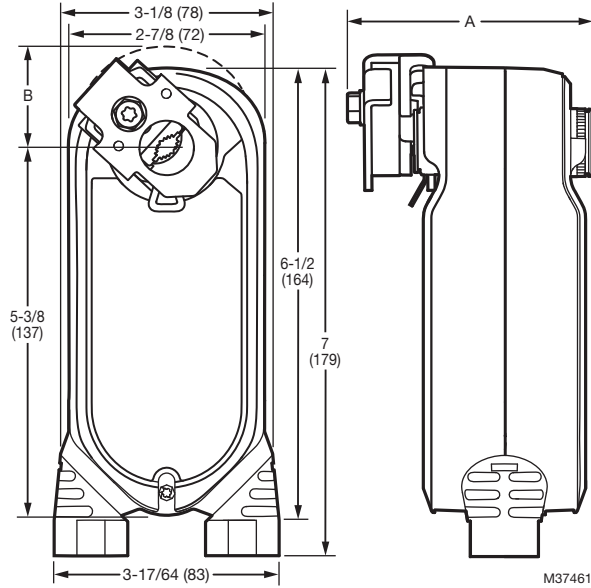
Dimensional drawing of actuator in in. (mm). See Table 2 for A and B dimensions.
